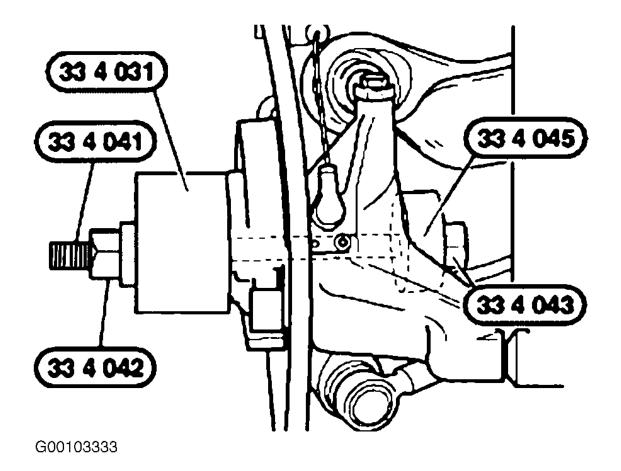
Removing Wheel Bearing Courtesy of BMW OF NORTH AMERICA, INC.
